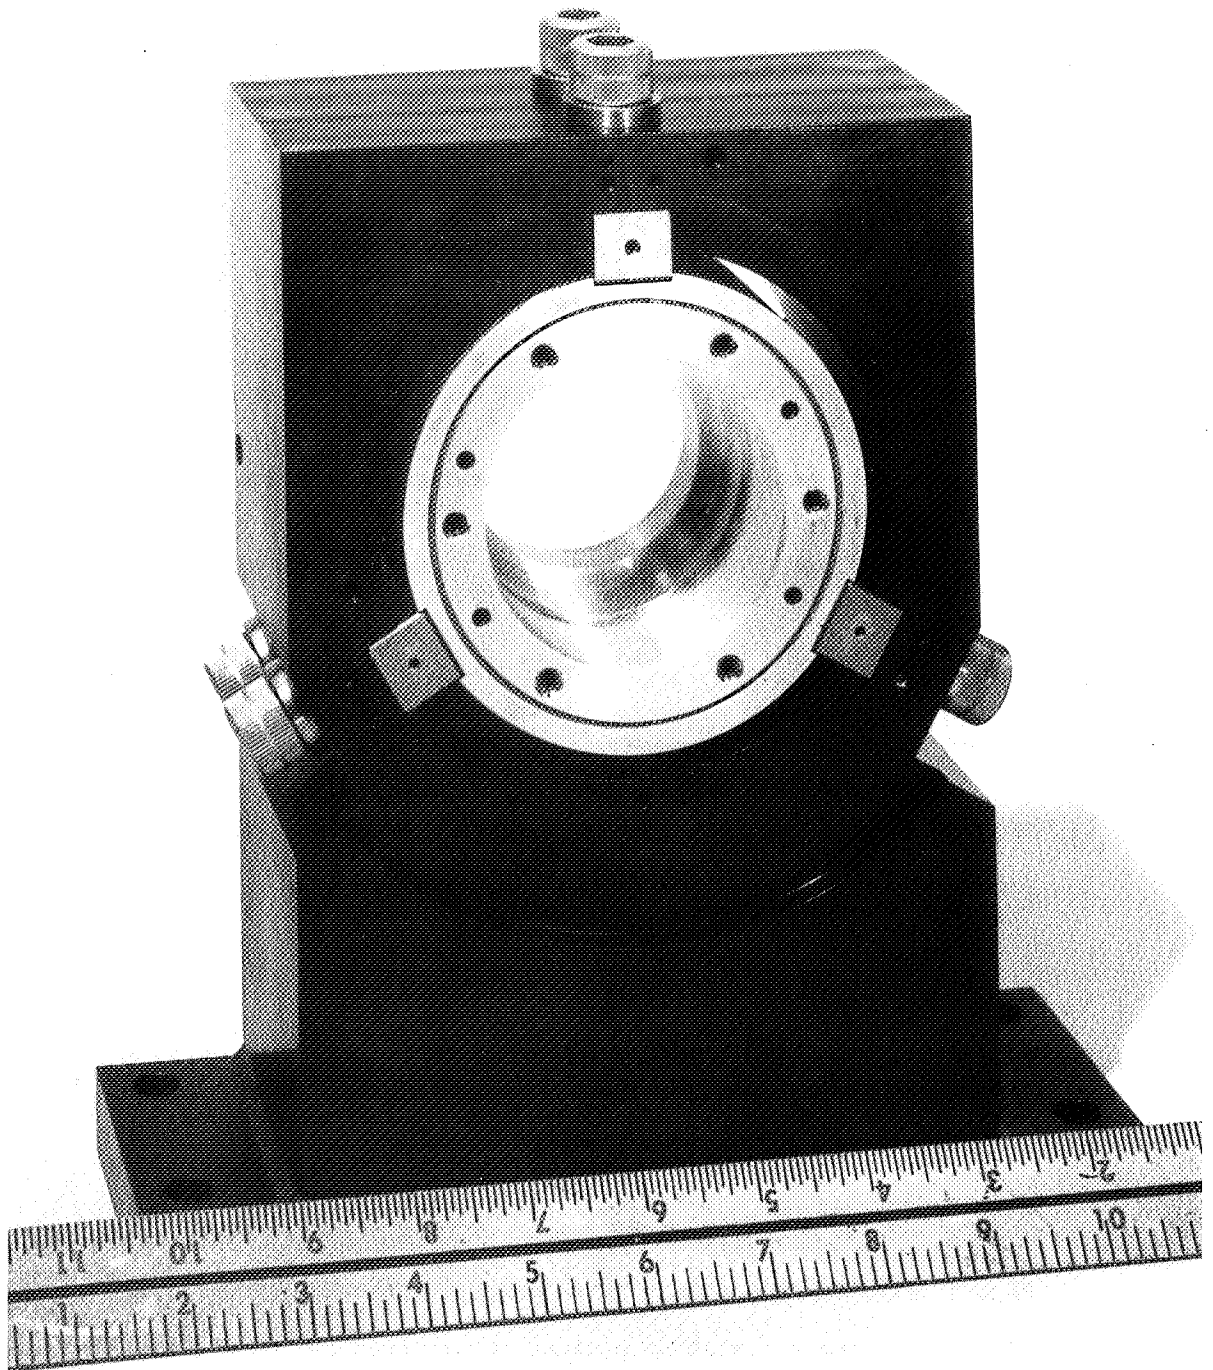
Partially Assembled Disc, Bearing Housing and Pedestal
